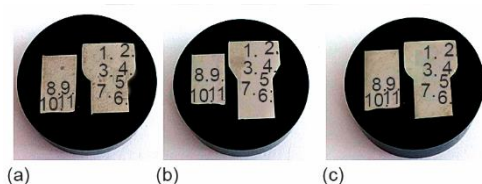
Hardness measurement points on bakelite of the samples produced according to different extrusion dies; (a) radius extrusion die used, (b) angle extrusion die used, and (c) radius and angled extrusion die used
